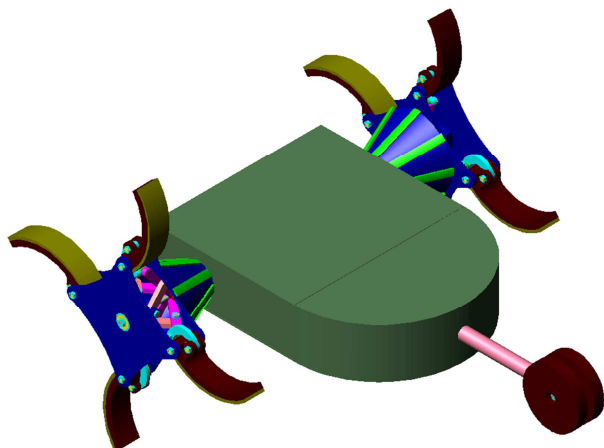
Isometric View of ELAN Robot with Cover plate while Expanded Wheel
